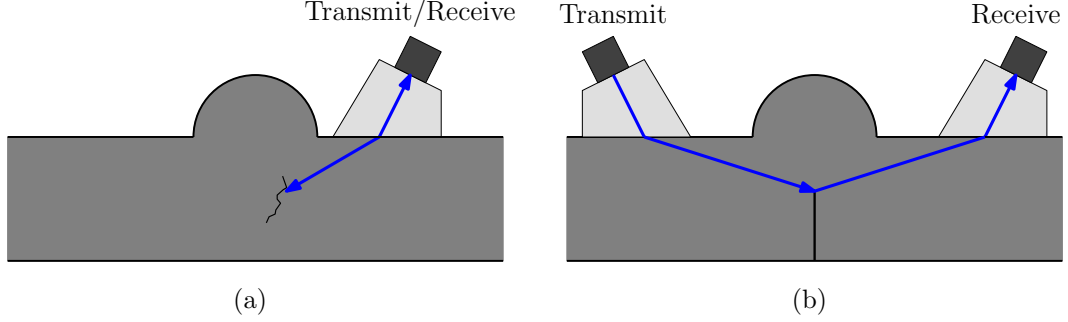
(a) Pulse-echo and (b) pitch-catch transducer configurations for ultrasonic weld inspection
